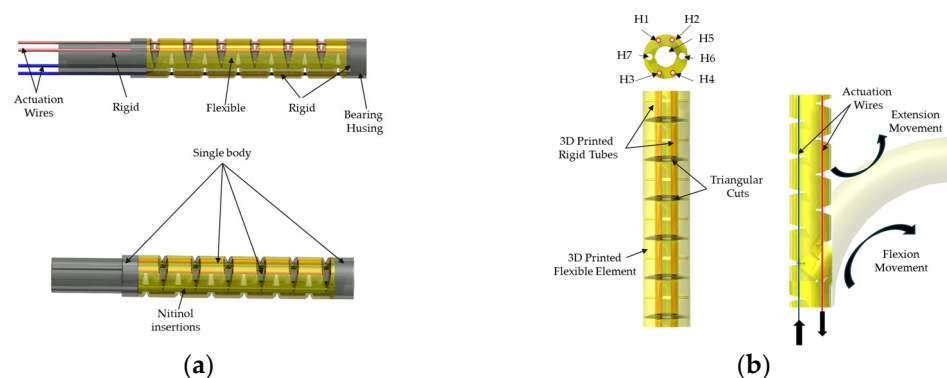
Flexible distal head: (a) main components and movements; (b) exploded view of the flexible distal head.
